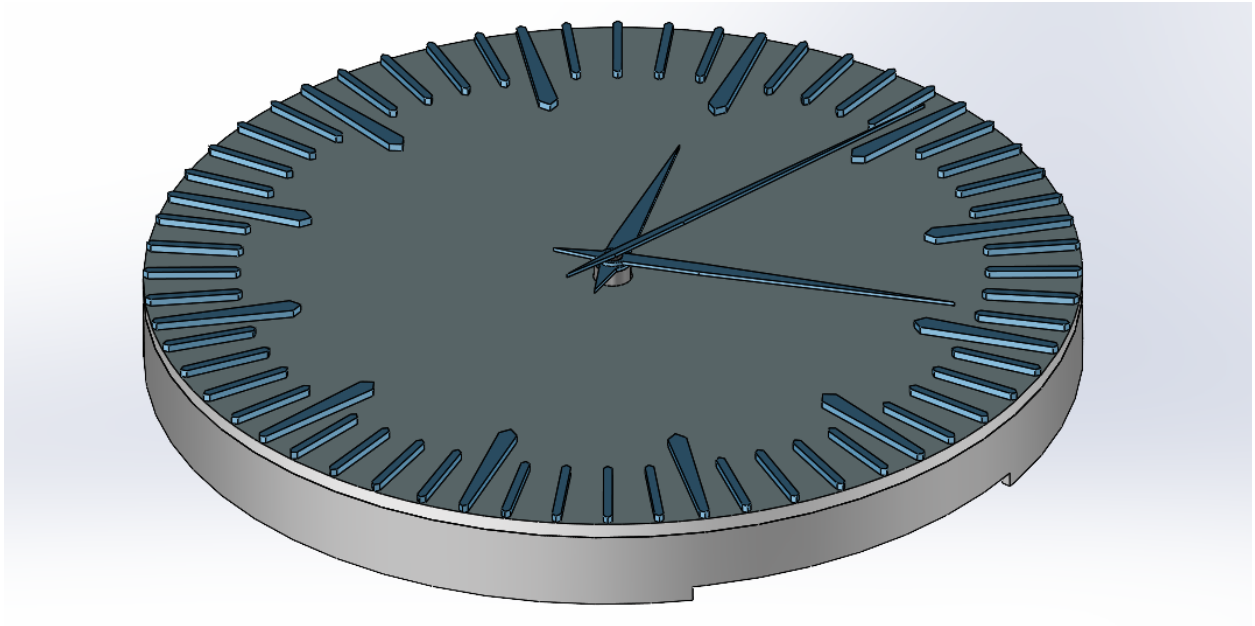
The isometric view of the final assembly for the mechanical watch project.
